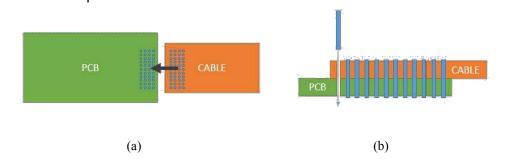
(a) Connecting PCB and Kapton cable by pressing fit a pin between the two. (b) Wire bond between PCB and the cable. Figures are extracted from [9].
